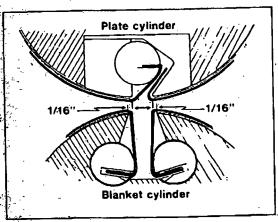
Cross-section of a typical plate lock-up mechanism. The reel rod is turned with a wrench and locked into position through a ratchet-trip arrangement. As shown above, the plate is fully tightened. Note that in the drawing the plate lead edge is hooked over the cylinder nose. Actually, the lead edge is wedged against the nose by the reel rod when the plate is fully tightened.
